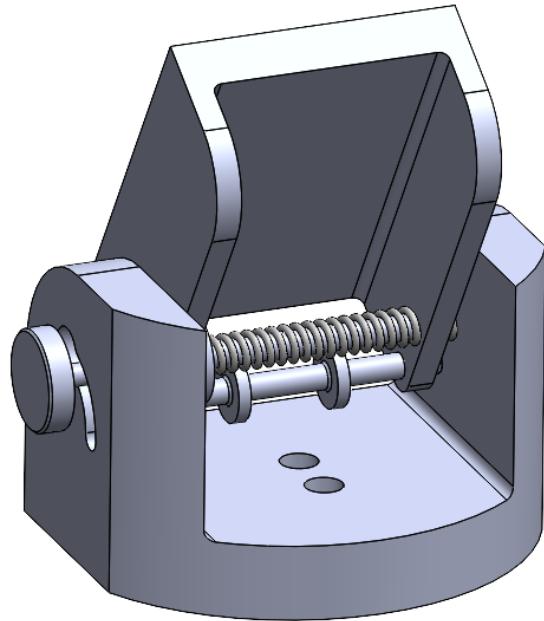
Hinge design with slotted CAM to lock hinge perpendicular to base. The hinge is driven by a compressed torsion spring not pictured.
